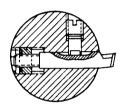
A lathe turning tool in a drill rod is adjusted by a differential screw. A special double-pin wrench turns the intermediate nut, advancing the nut and retracting the threaded tool simultaneously. The tool is then clamped by a setscrew.
